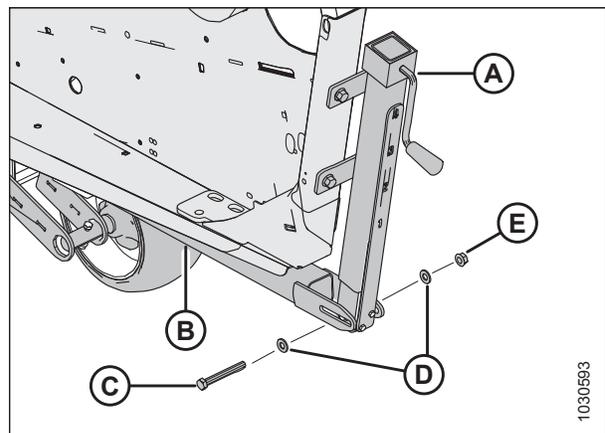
Jack and Outboard Wheel Assembly – View from Rear
